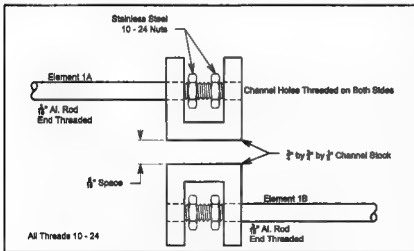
Cutaway End View Twin Boom Element Mounting System.
